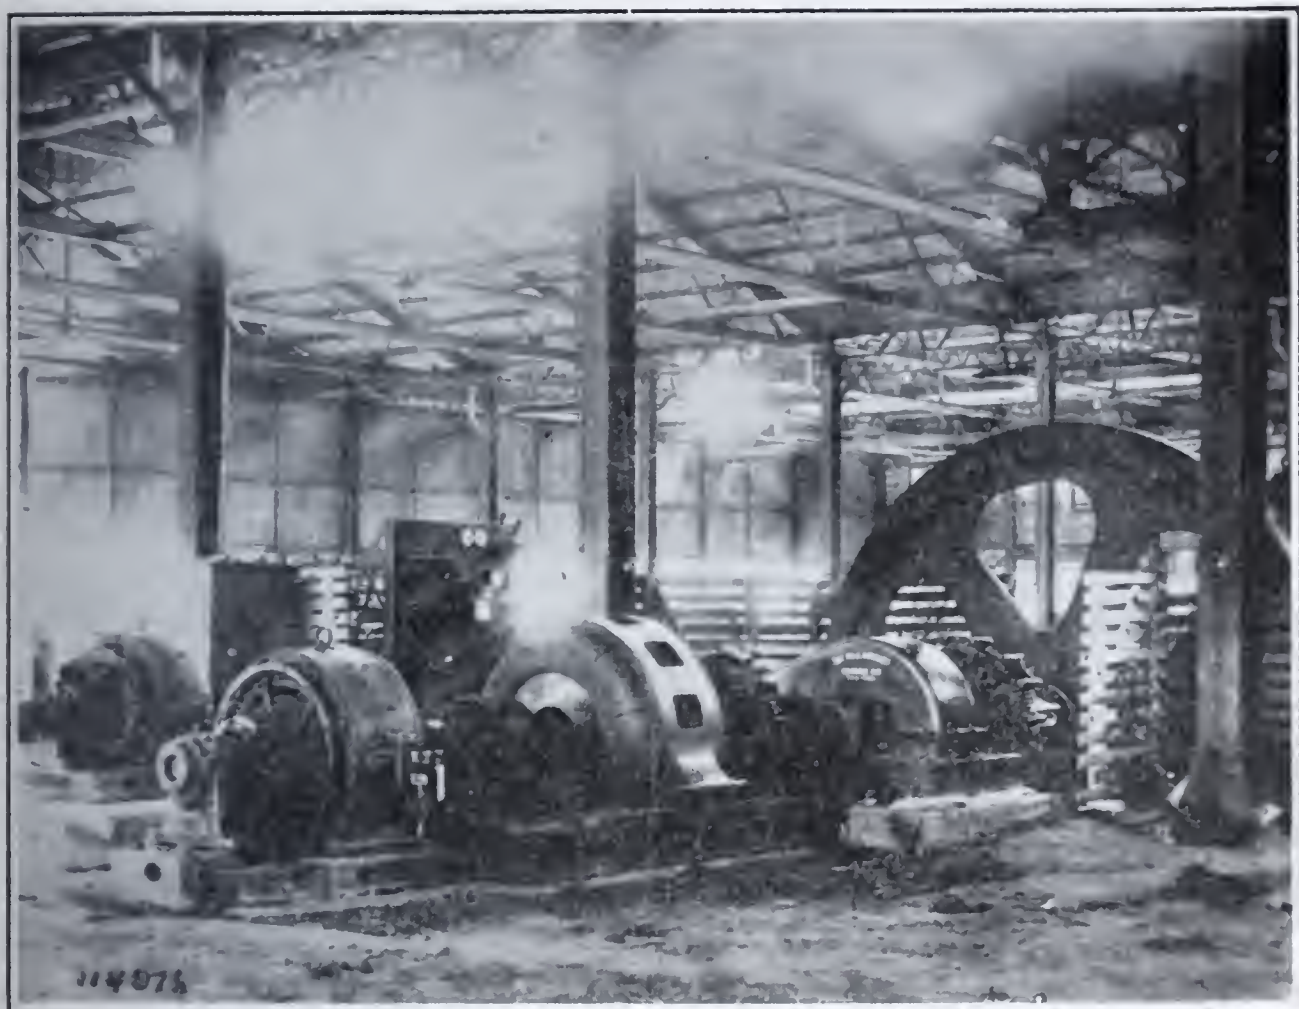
A 700-Horse-Power Equipment on 12-Inch Merchant Mill.
